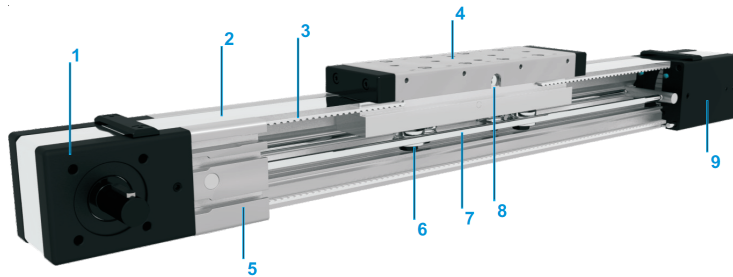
Belt-driven wheel-guided linear unit from Unimotion. Series MRJE. 1. Drive block with pulley; 2. Corrosion resistant protection strip; 3. AT polyurethane toothed belt with steel tension cords; 4. Carriage; 5. Aluminum profile; 6. Wheels; 7. Round guide; 8. Lubrication port; 9. Integrated belt tensioning system. Image taken from Unimotion technical sheets.
